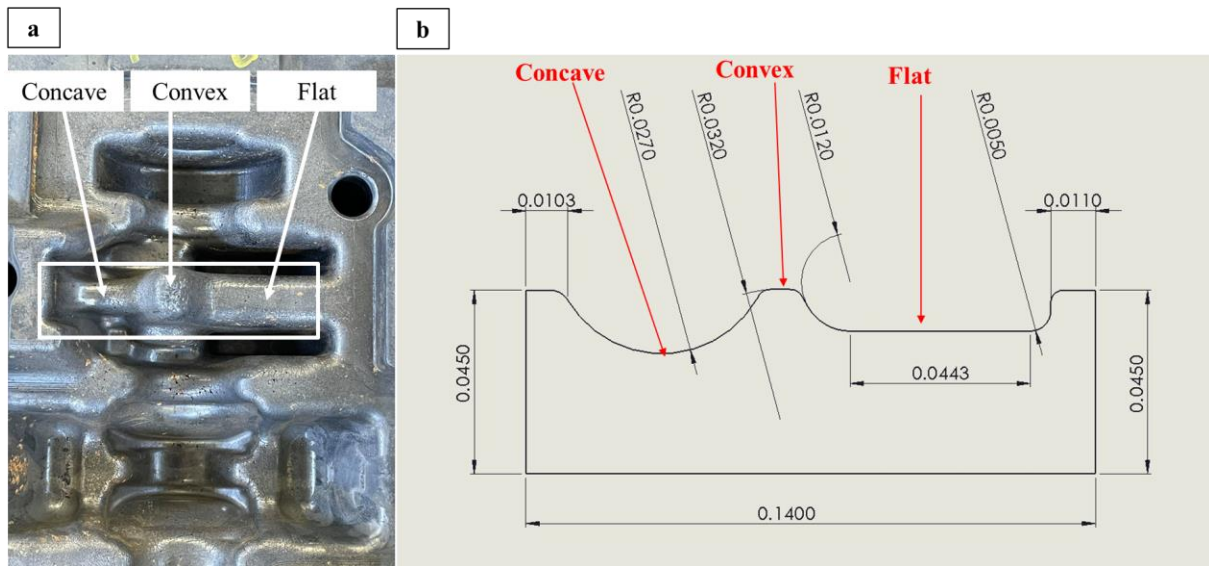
a) Three zones: convex, concave, and flat on the surface of the hot forging die, b) schematic of the tool geometry showing the assembly of the three zones.
